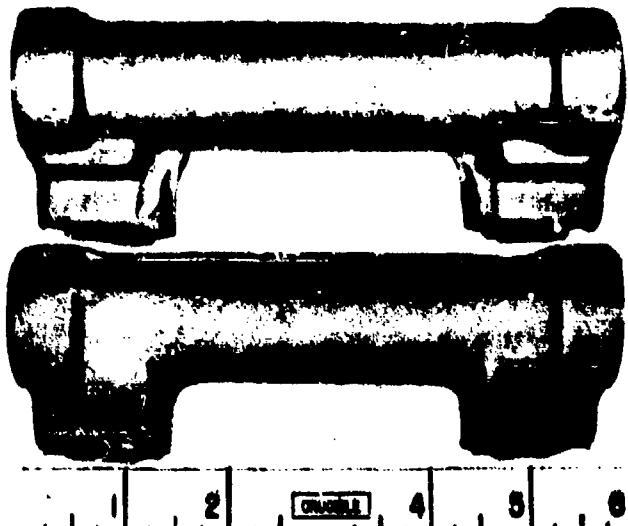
Cb-10W-5Zr CLOSED-DIE FORGINGS PRODUCED AT 2200 TO 2400 F(4) (AS FORGED, FLASH REMOVED)
